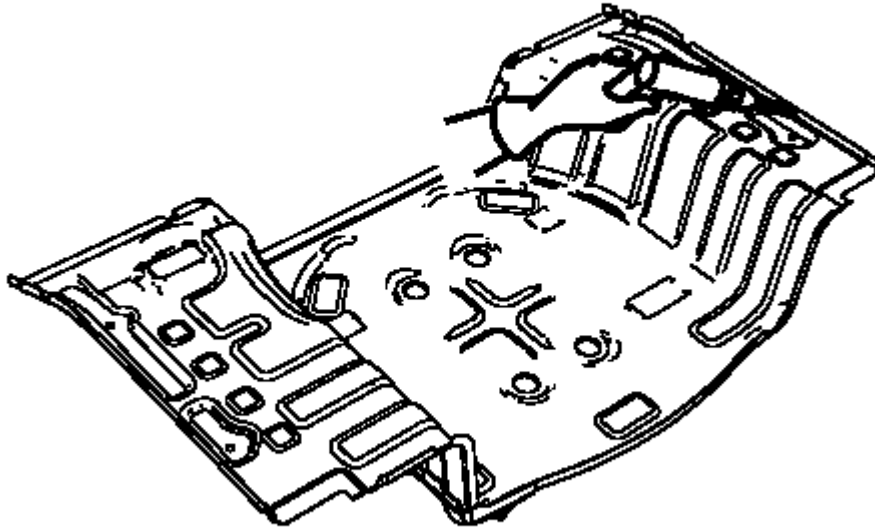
Drilling 8 Mm (5/16 In) For Plug Welding Along Edges Of Rear Compartment Floor Panel
